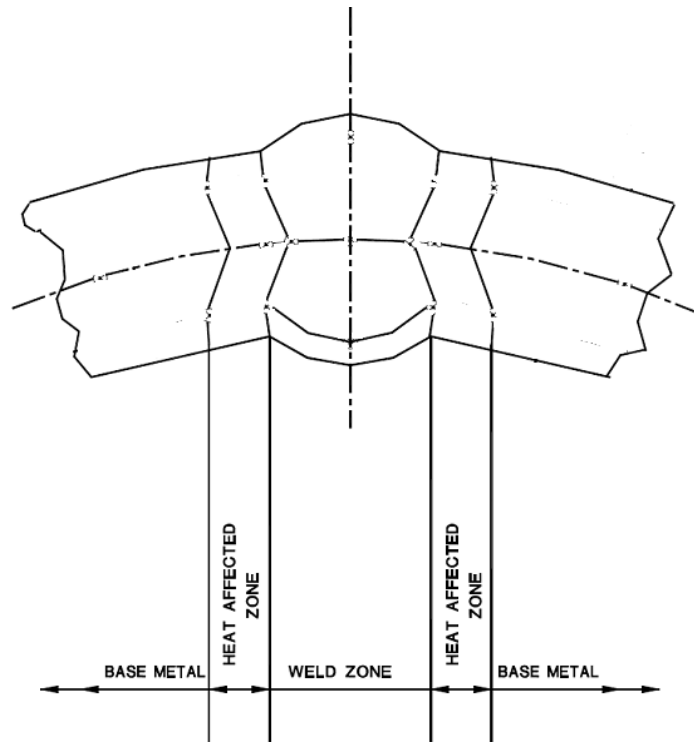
Cross section showing the spiral weld configuration
